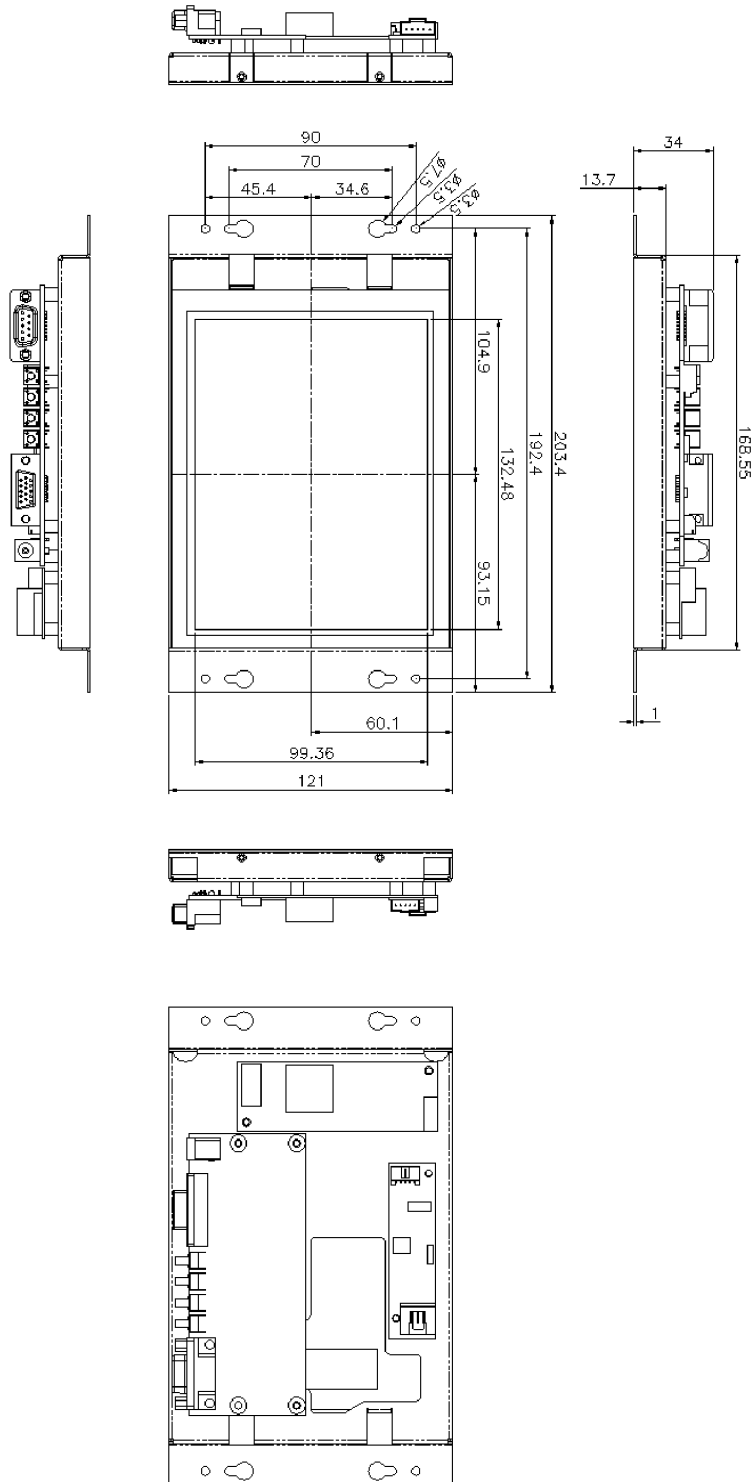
2007598 Physical Dimensions (millimeters)
